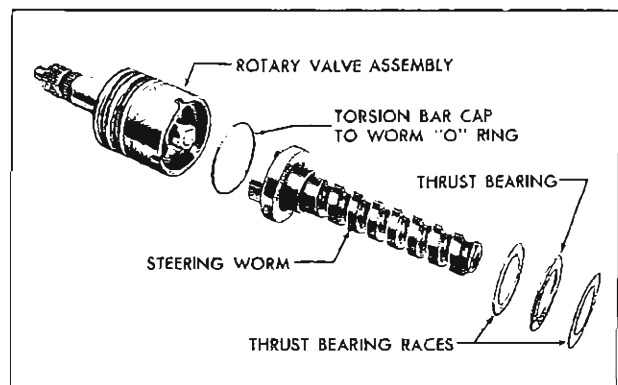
A-29 Worm Shaft and Rotary Valve — Exploded View
